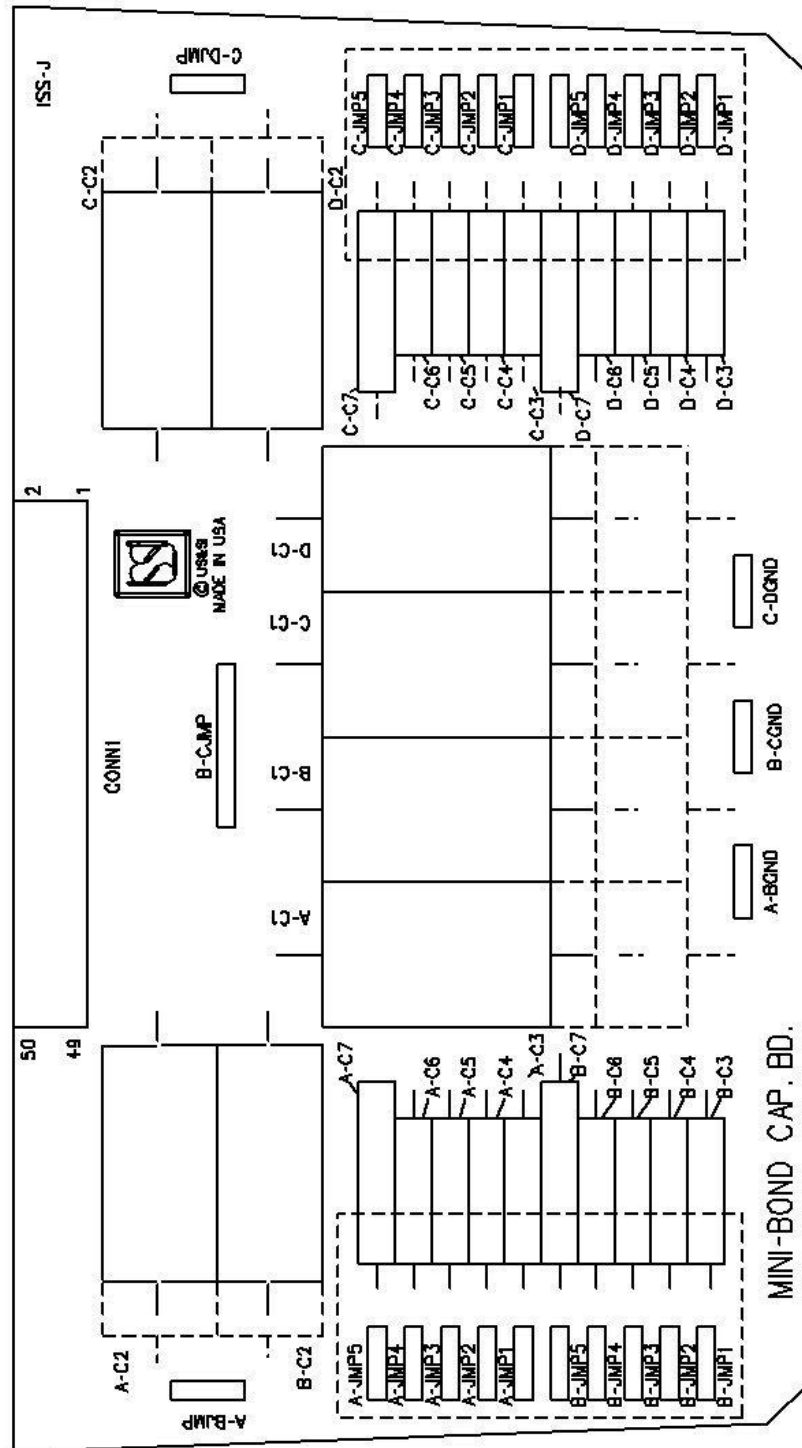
Component Parts Layout, Capacitor Printed Circuit Board
